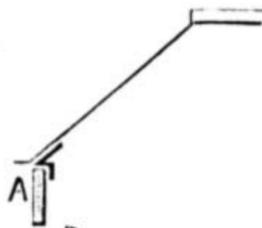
Section of Tin shade A, Section of Brass Rim supporting it.
